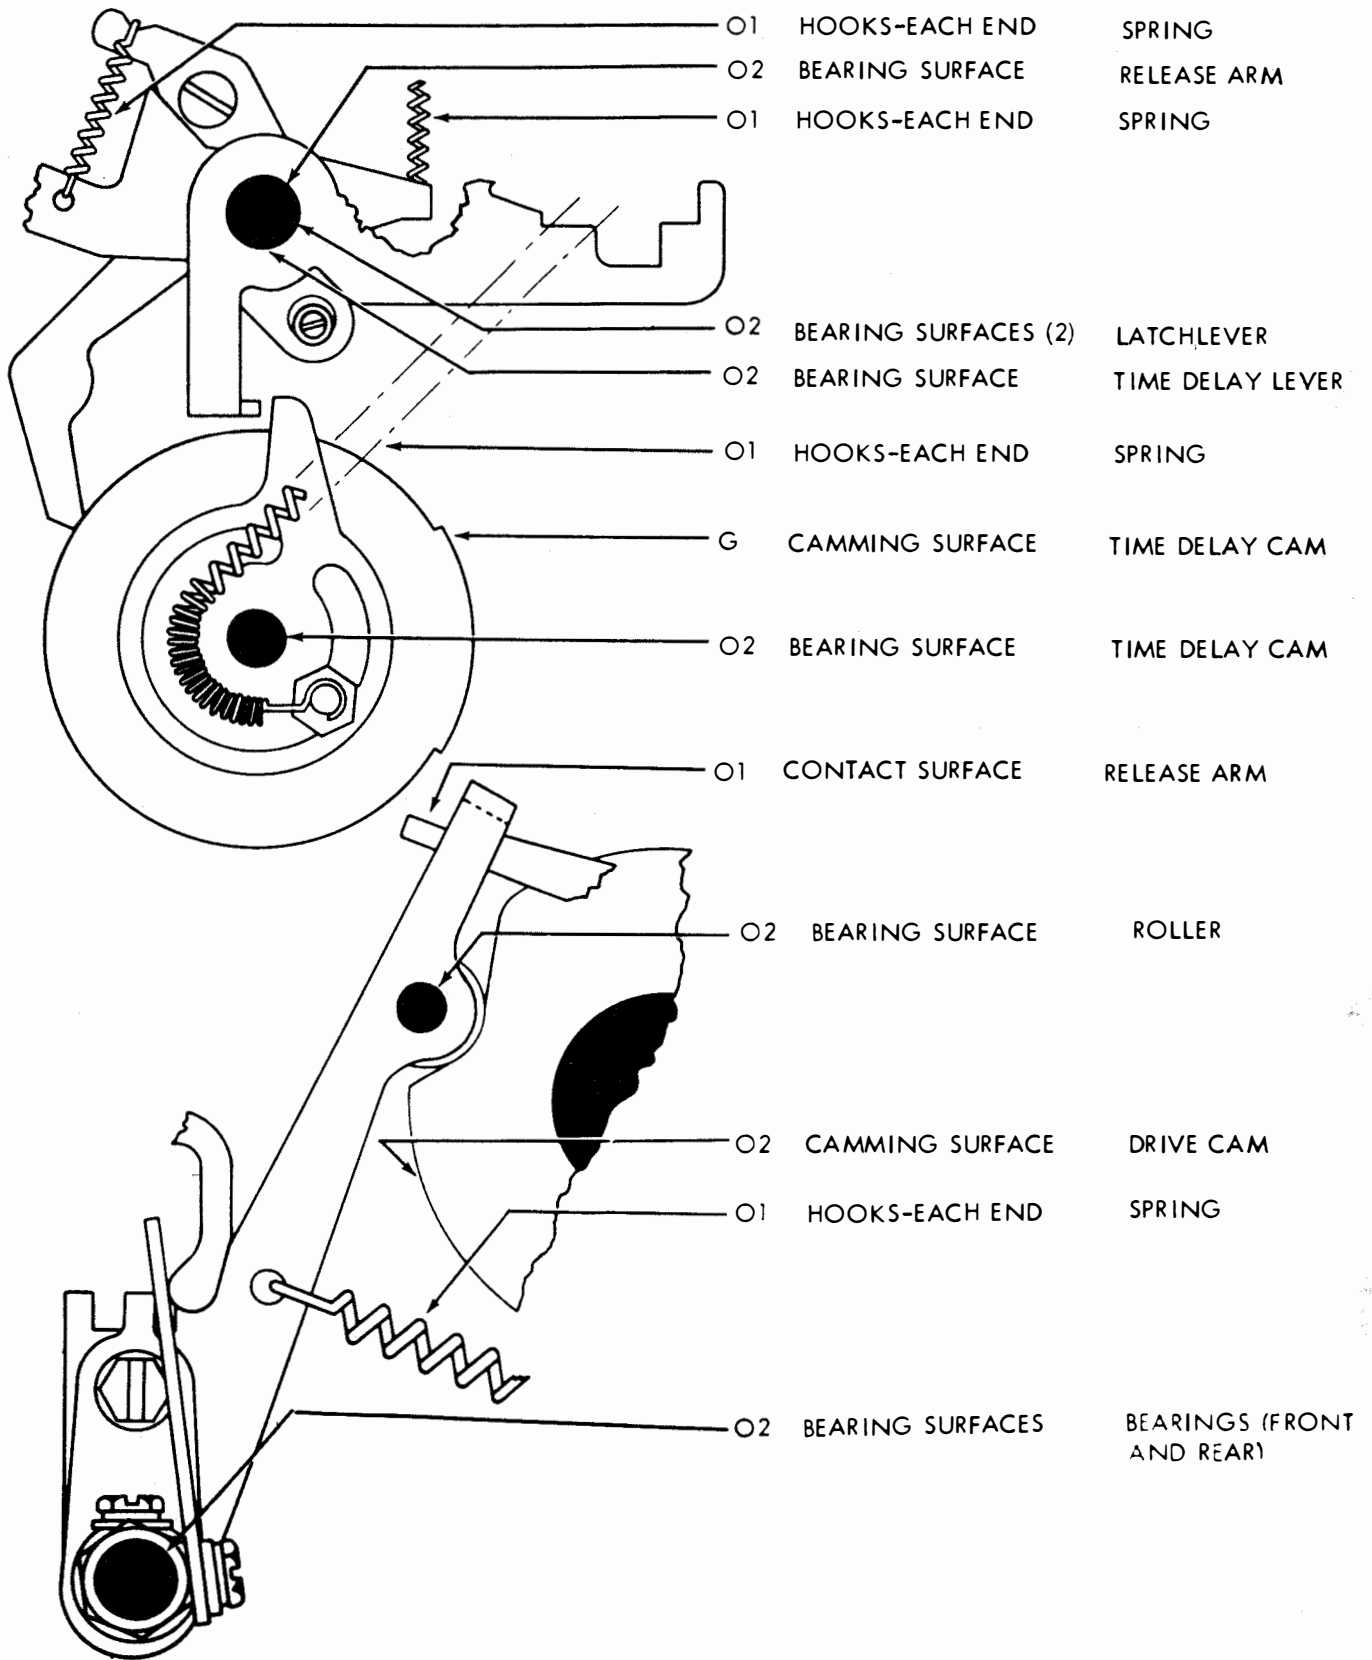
Remote Control Non-Interfering BLANK Tape Feed-Out Mechanisms, Later Design
